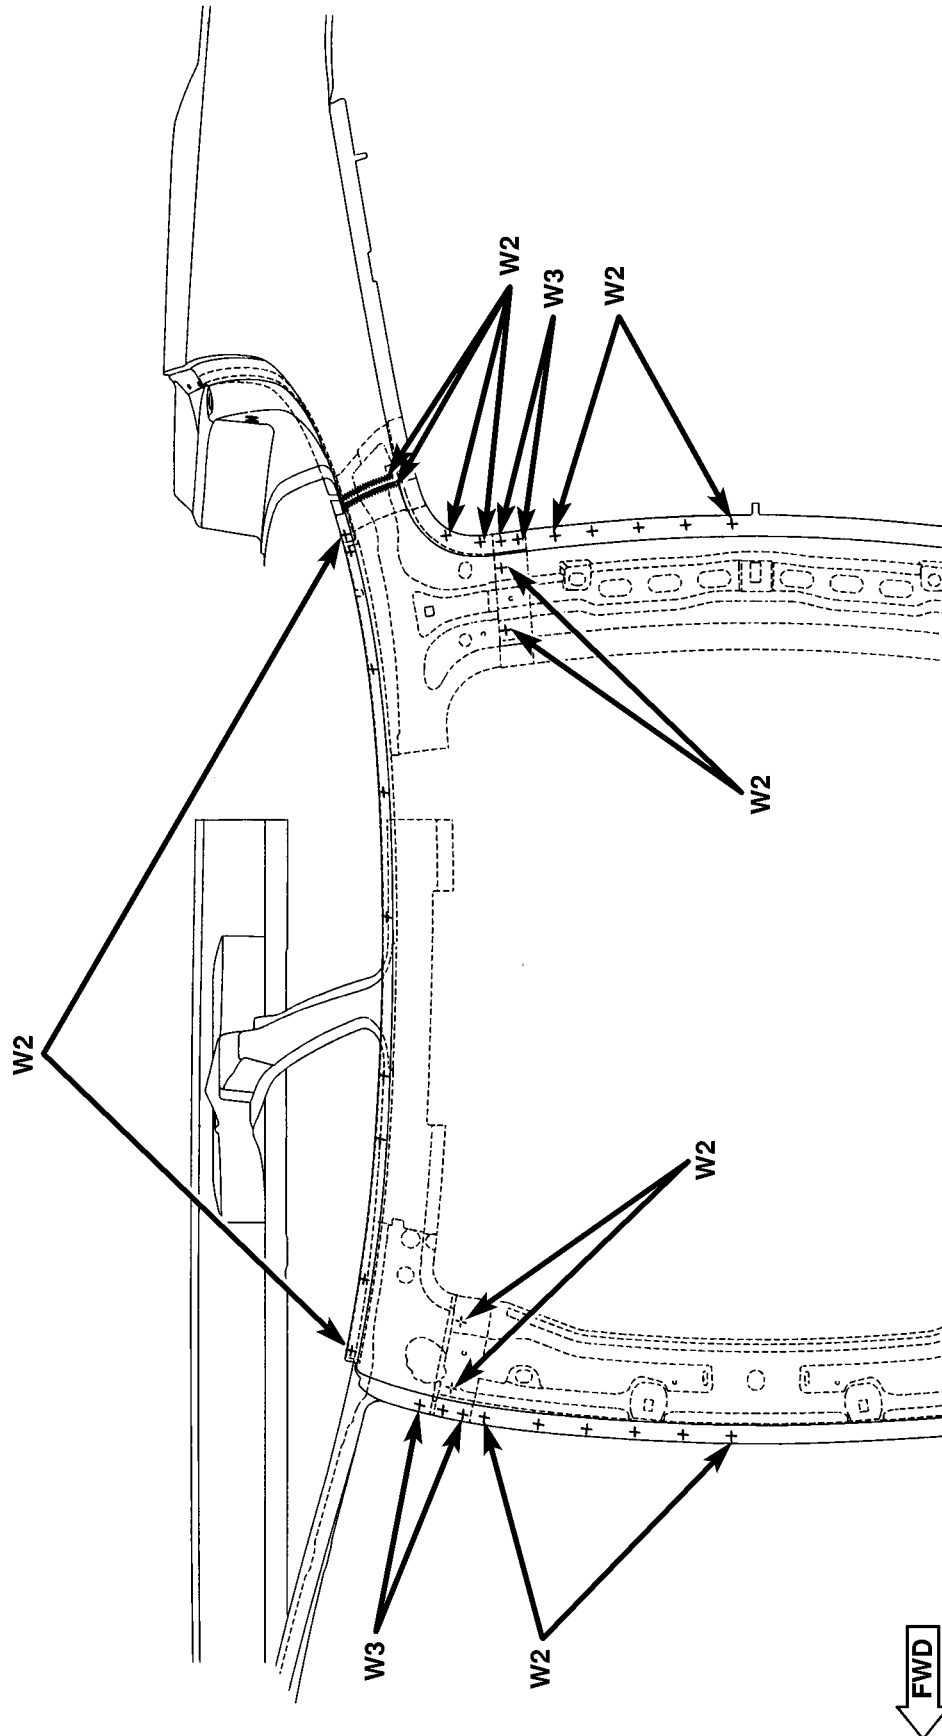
REAR FLOOR PAN SIDE RAIL TO LOWER DECK OPENING PANEL/REAR WHEELHOUSE TO QUARTER EXTENSION TO REAR FLOOR PAN
